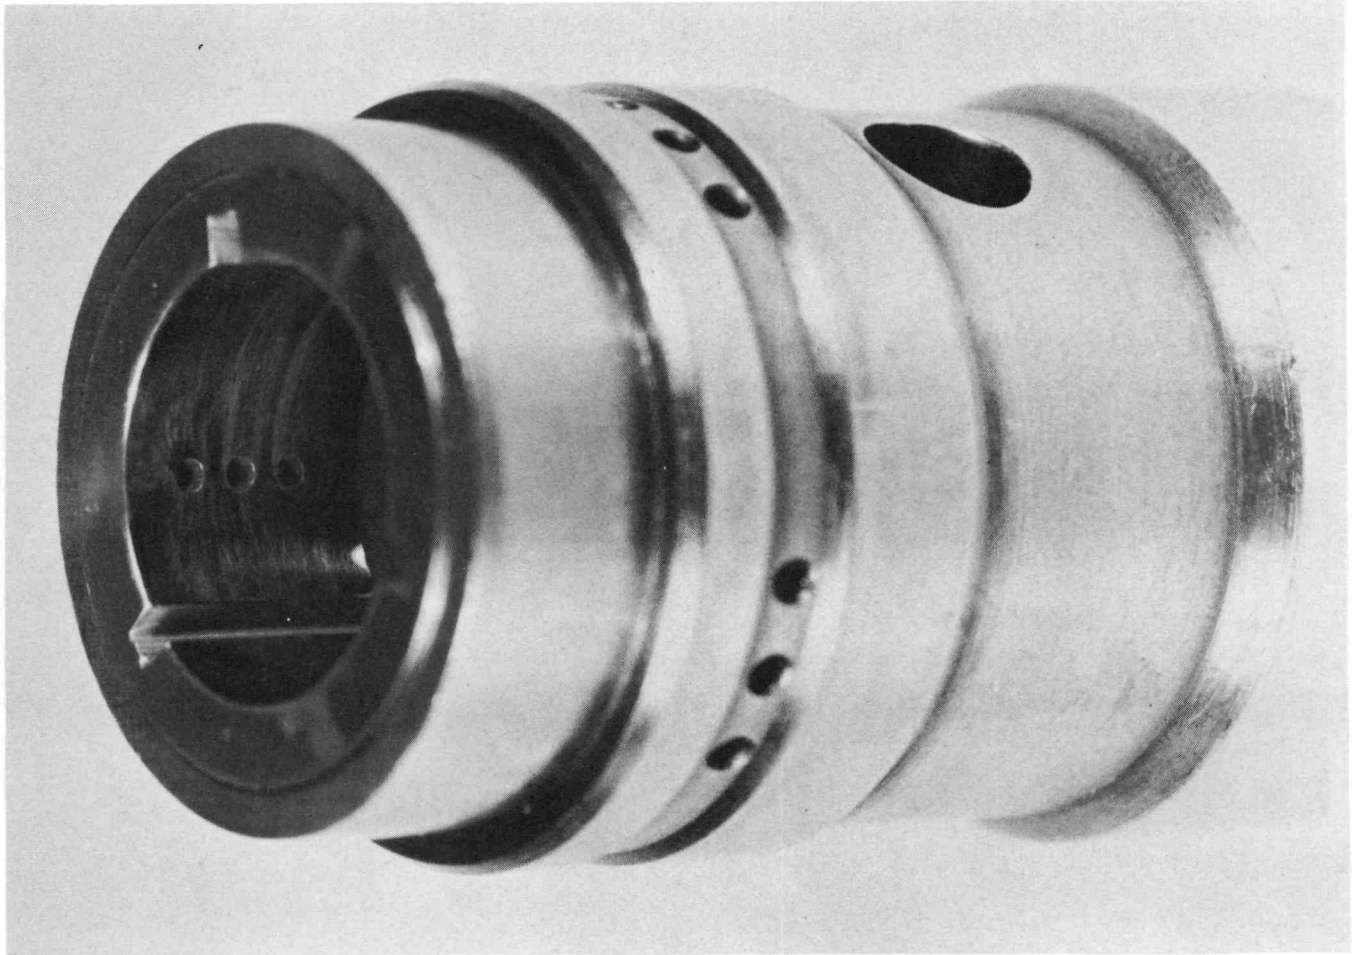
Three-Sector Bearing Without Recessed Supply Pad
